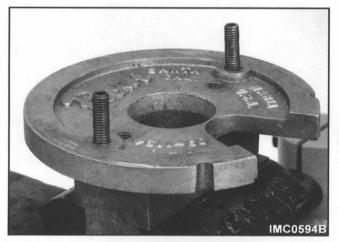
Flywheel-rebuilding jig mounted in a vise
